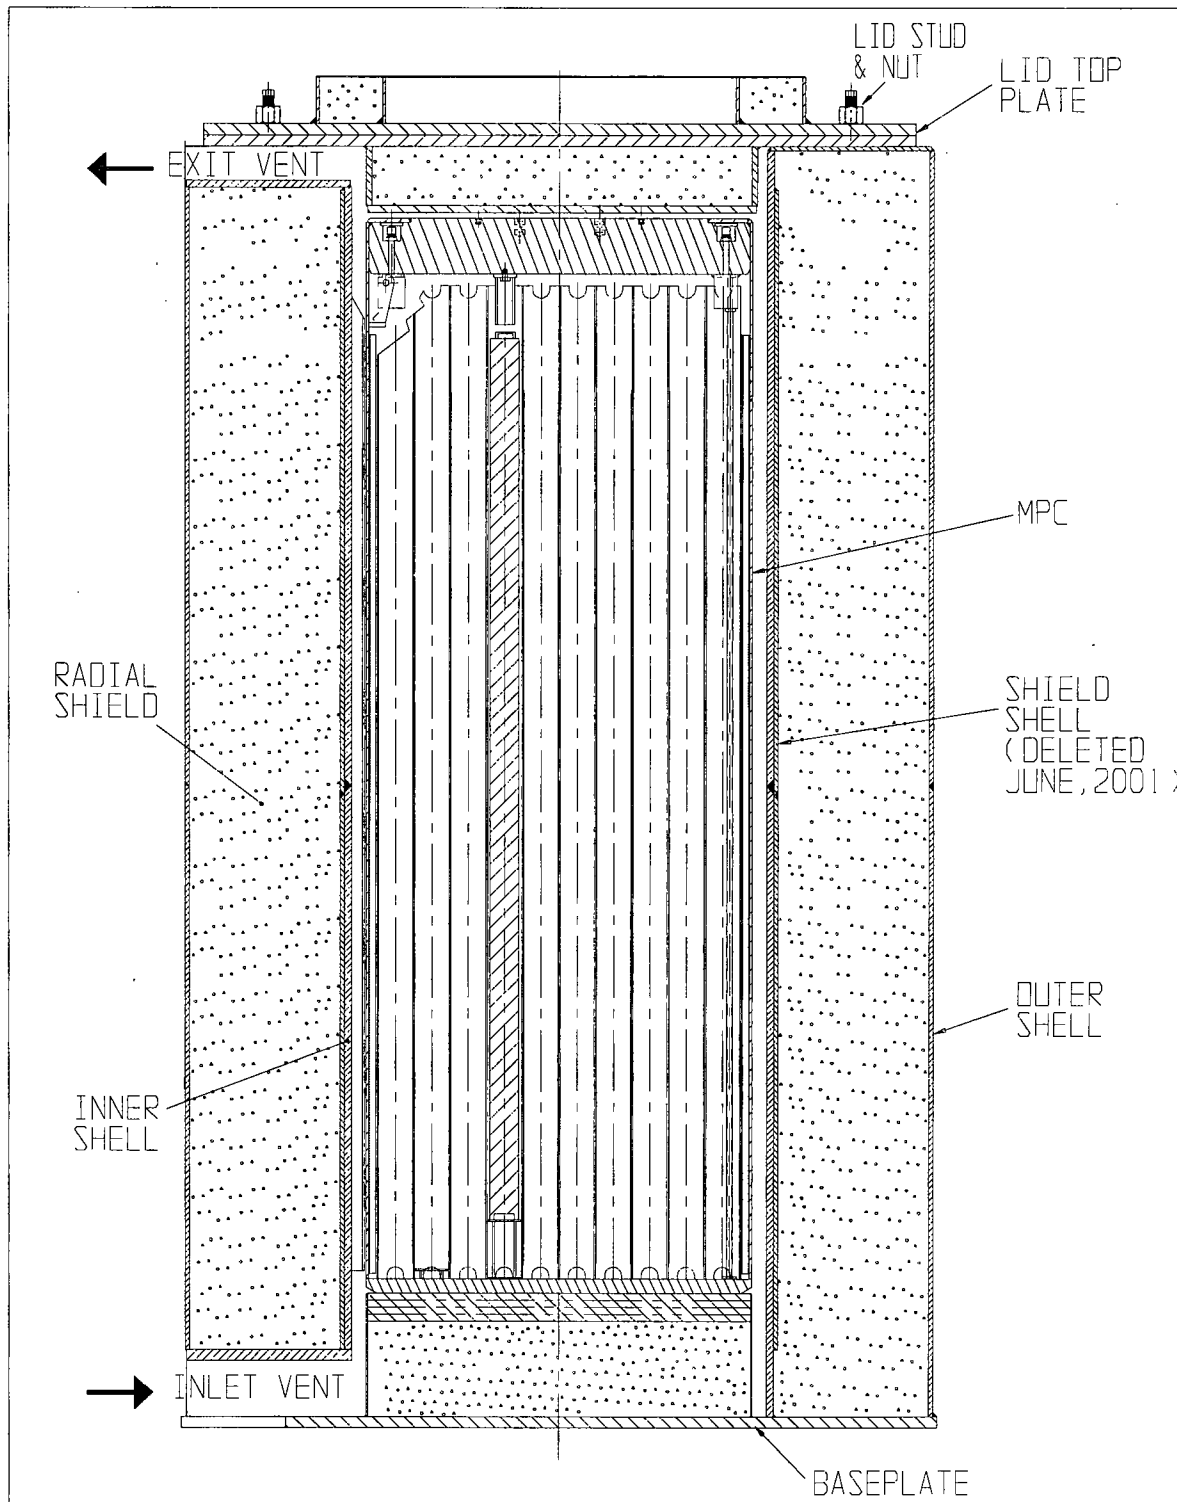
; CROSS SECTION VIEW OF THE HI-STORM 100 SYSTEM
